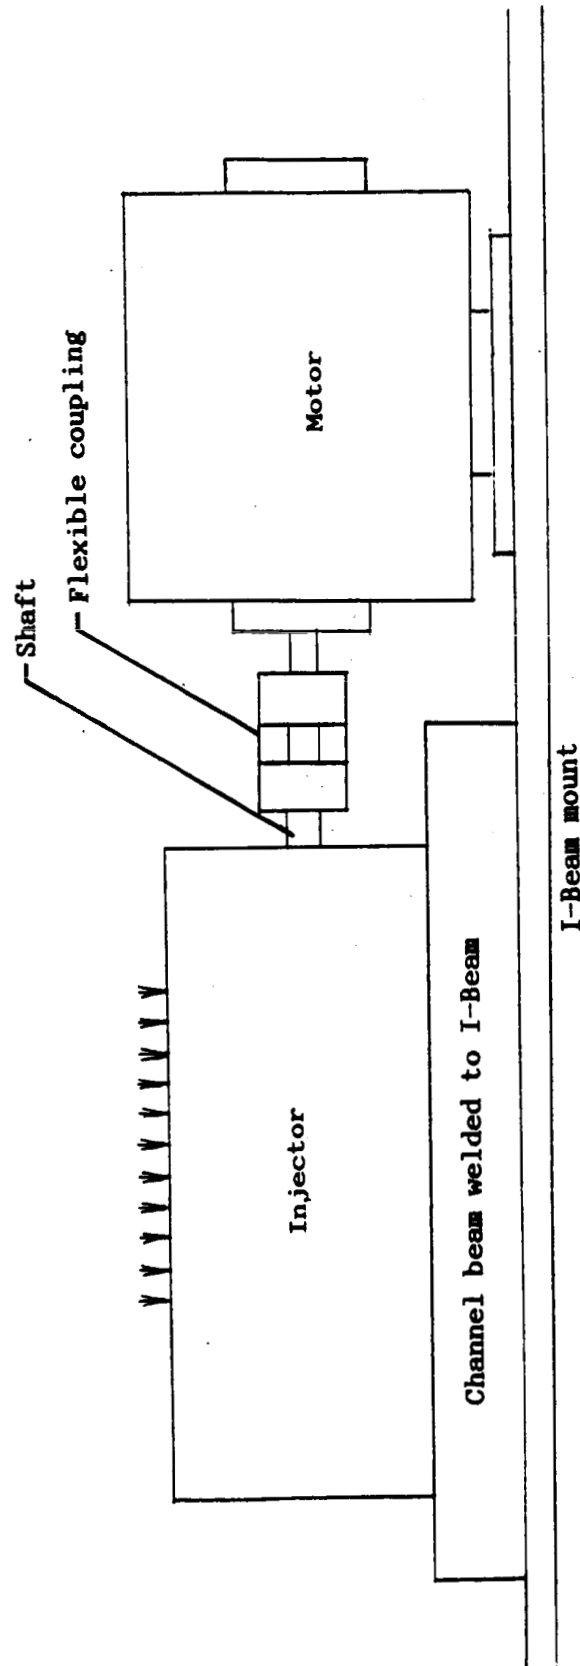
Assembled view of prototype injector showing coupling to drive system.
